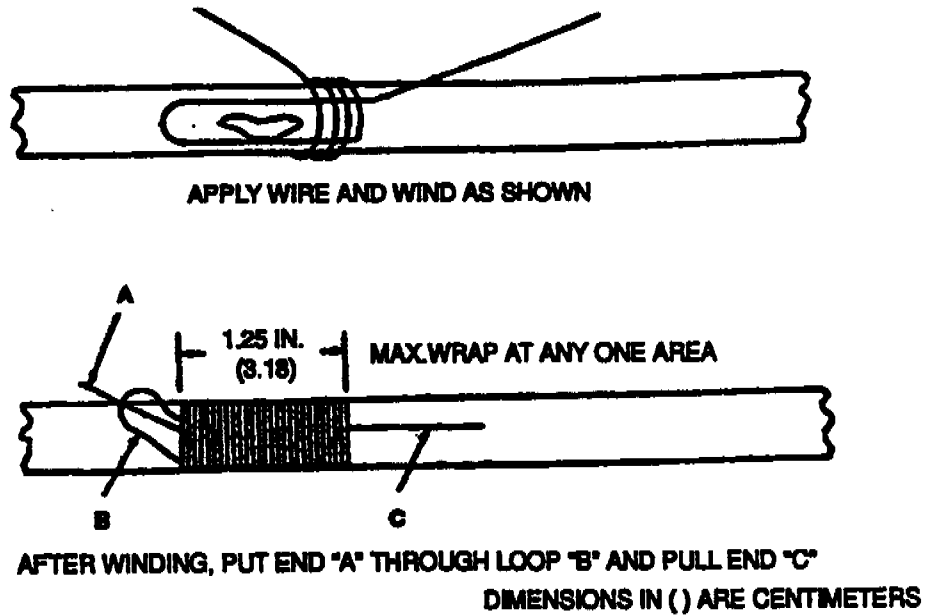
Exhaust Thermocouple Assembly Repair.
